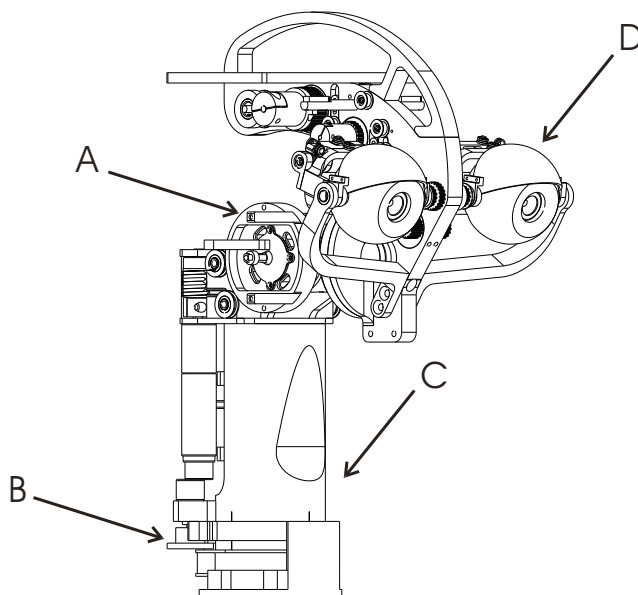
Mechanical drawing of Domo's active vision head. A SEA actuator driven universal joint (B) combined with head pan (C) provides a compact ball-and-socket like 3 DOF neck. The upper neck provides roll and tilt through a cable-drive differential (A). Two FireWire CCD cameras (D) share a single tilt DOF and have 2 independent pan DOF. Expressive eyelids provide a final DOF.
